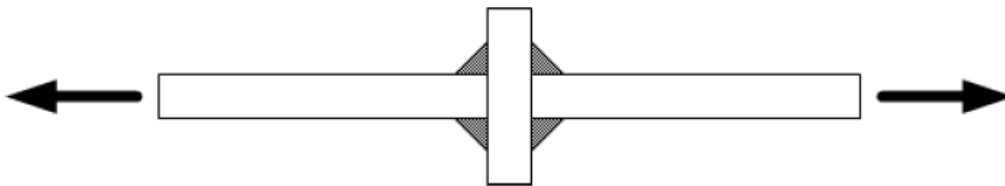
Cruciform Configuration Out-of-Plane Fillet Weld Loading
